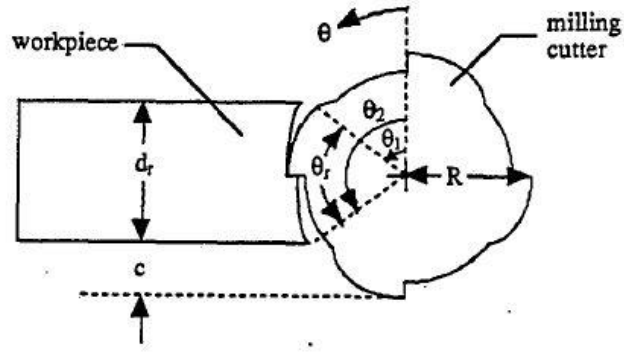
2D dimensional view of 4-tooth milling cutter [10]
